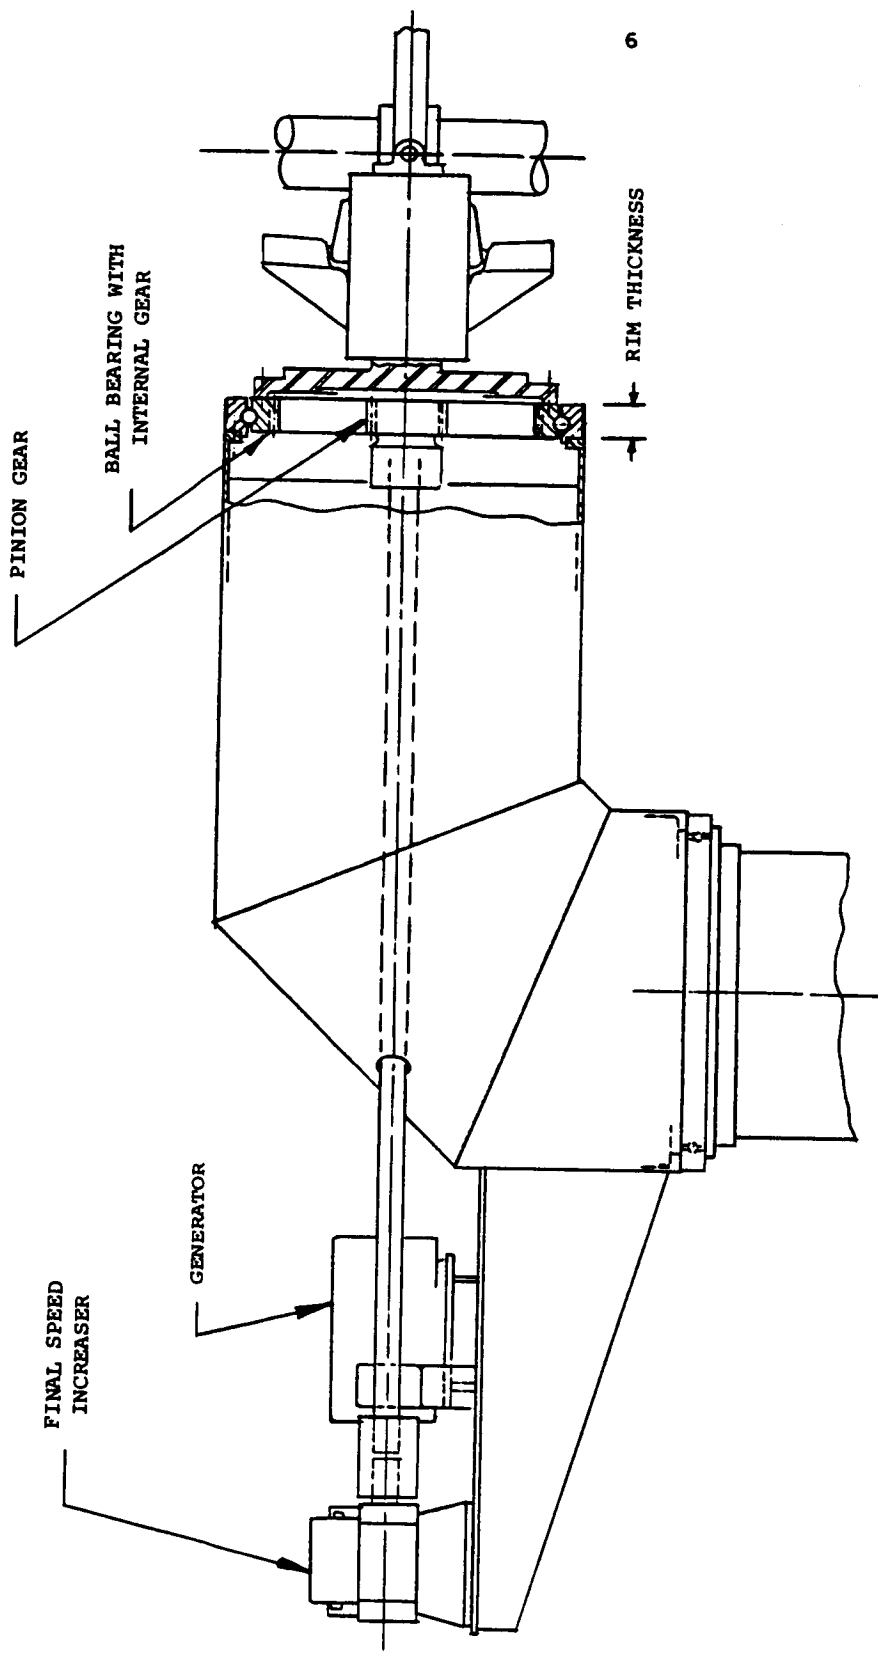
Wind Turbine Concept Utilizing Internal Gear Drive
